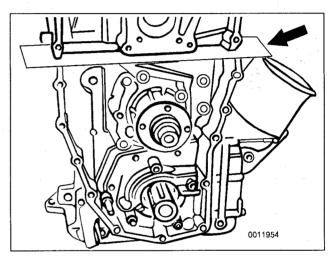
Use thin sheet metal (arrow) to protect profile gasket during installation of timing chain case. Carefully withdraw sheet metal after tightening fasteners.
